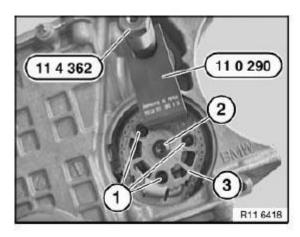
Identifying Screw And Sprocket Wheel Courtesy of BMW OF NORTH AMERICA, INC.
